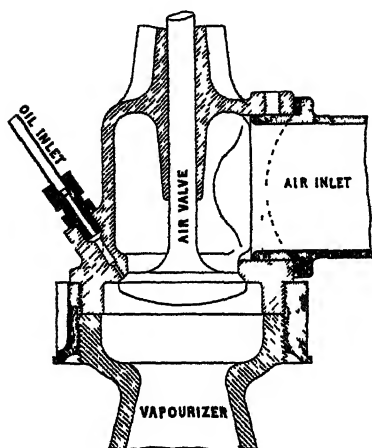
Section, on enlarged scale, through air valve box in the "Tangye" Oil-Engine.
